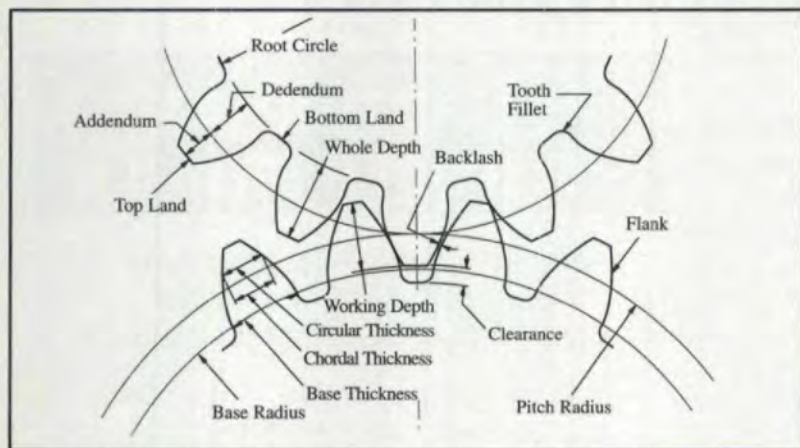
Gear design nomenclature. Courtesy of Van Gerpen and Reece Engineering.
